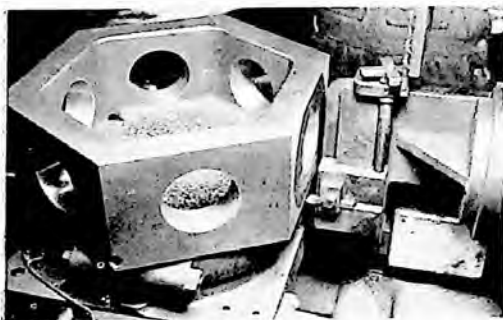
Refacing Turret with Fixture Mounted in Spindle
